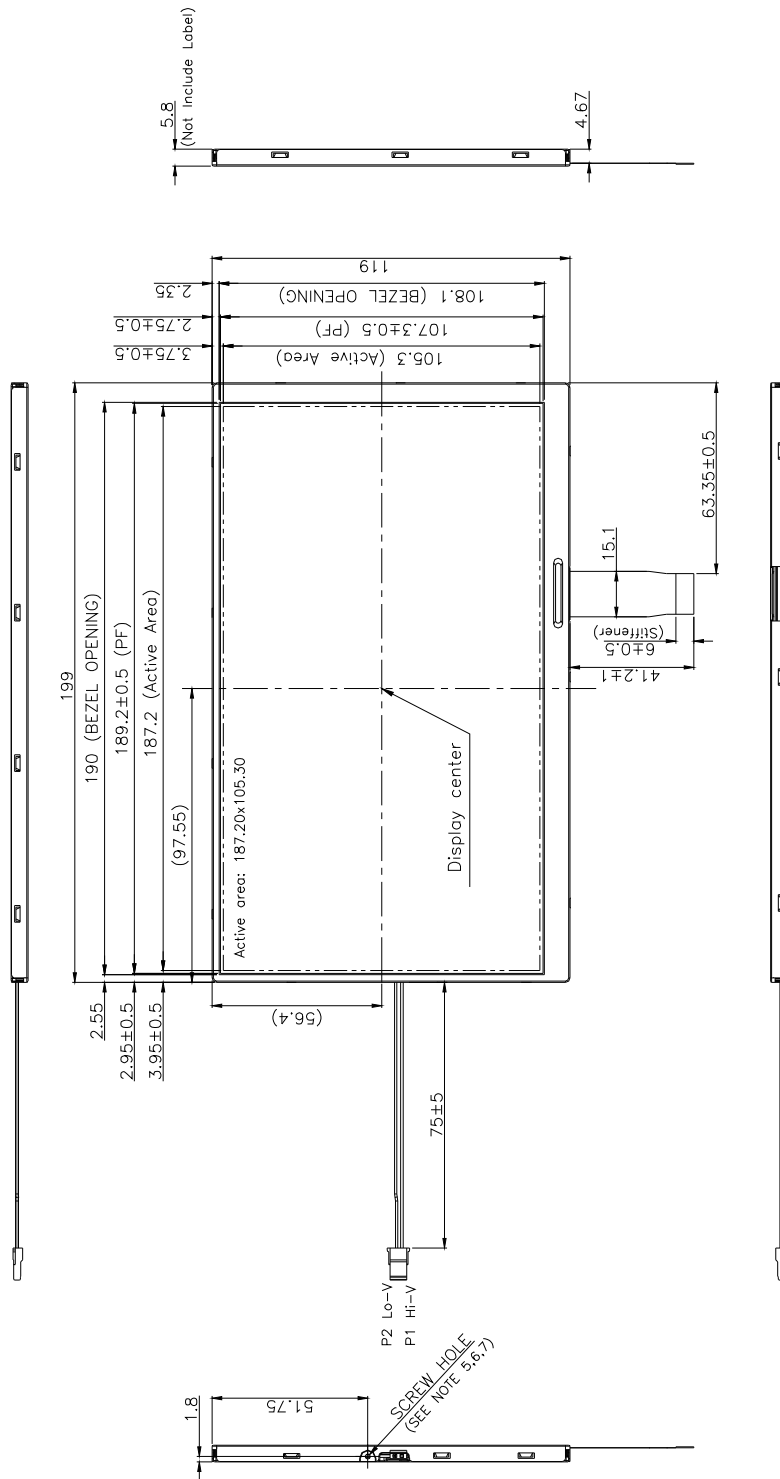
(a) Outline dimension of TFT-LCD module (Front side)
